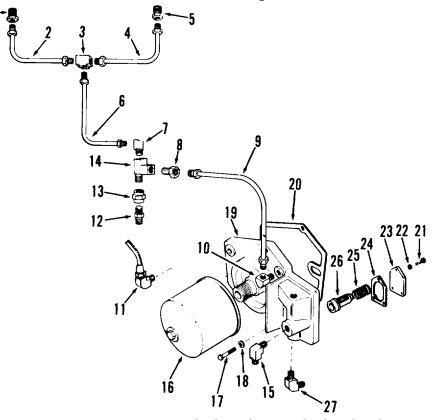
Oil Lines, Oil Filter Adapter and Oil Cooler Thermostat.
